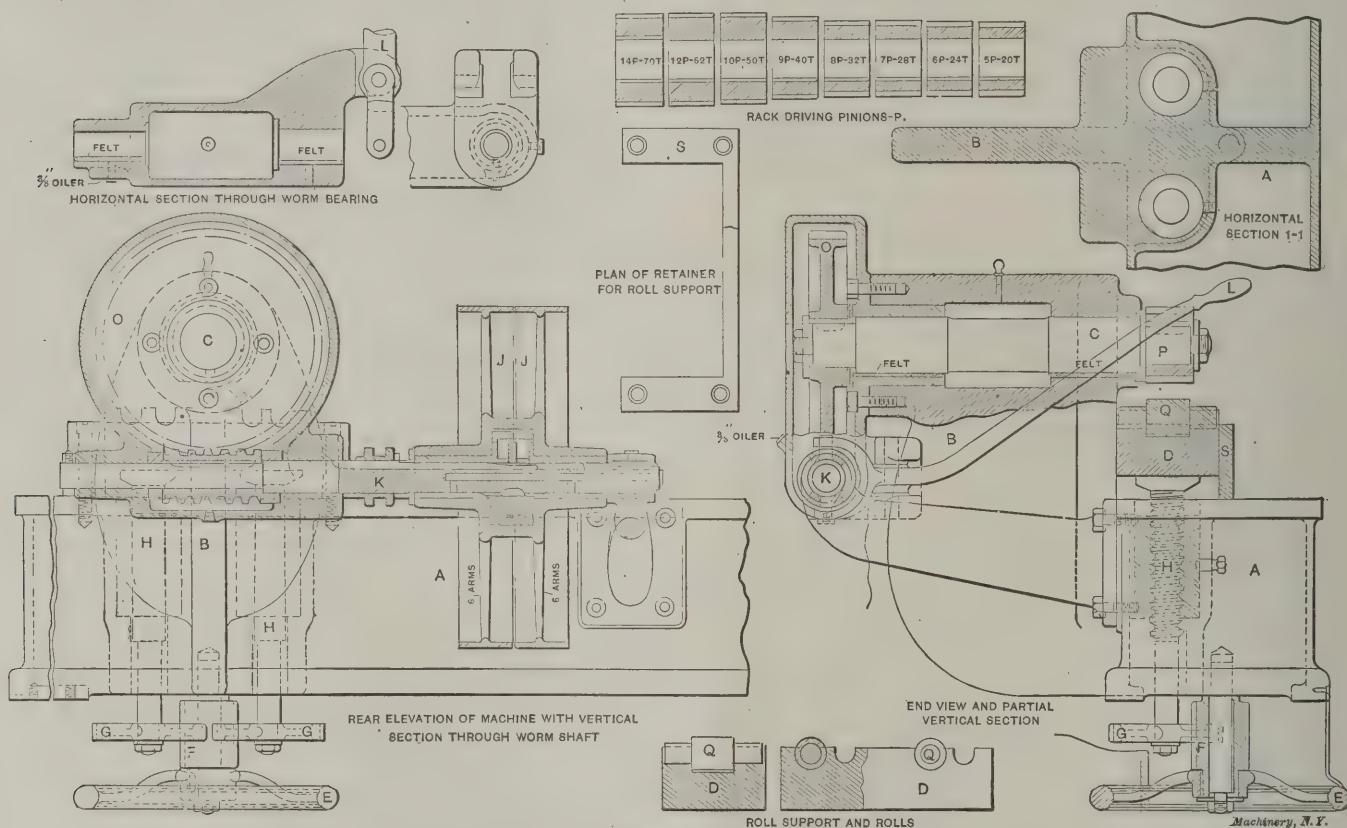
Machine for Straightening Cold-rolled Steel Racks.
